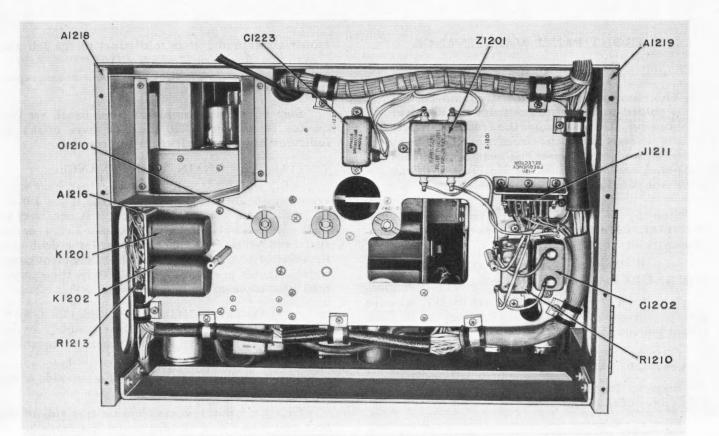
Radio Receiver R-278B/GR, Front View, Front Panel Removed
